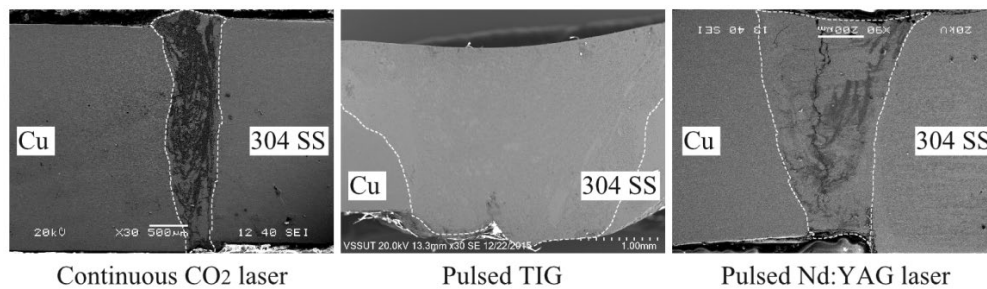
Weld pool geometry for different welding processes.
